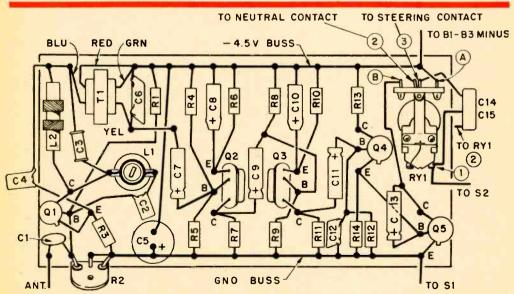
Receiver will fit on a 31/8x2-inch piece of perforated board. Run buss wires along top and bottom and use spaghetti on wires that cross. Brass eyelets should be used for tie points. They take up less space than flea clips. Holes for mounting brackets are bored between R10 and R13, and C3 and L1.
